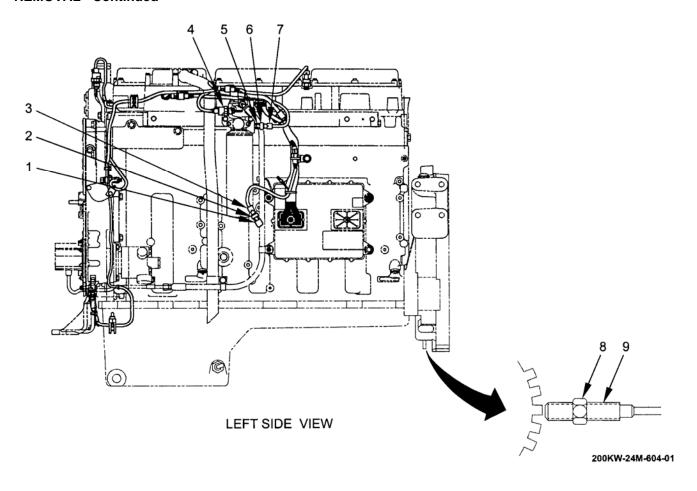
Engine Electrical System Repair (Sheet 1 of 3).
